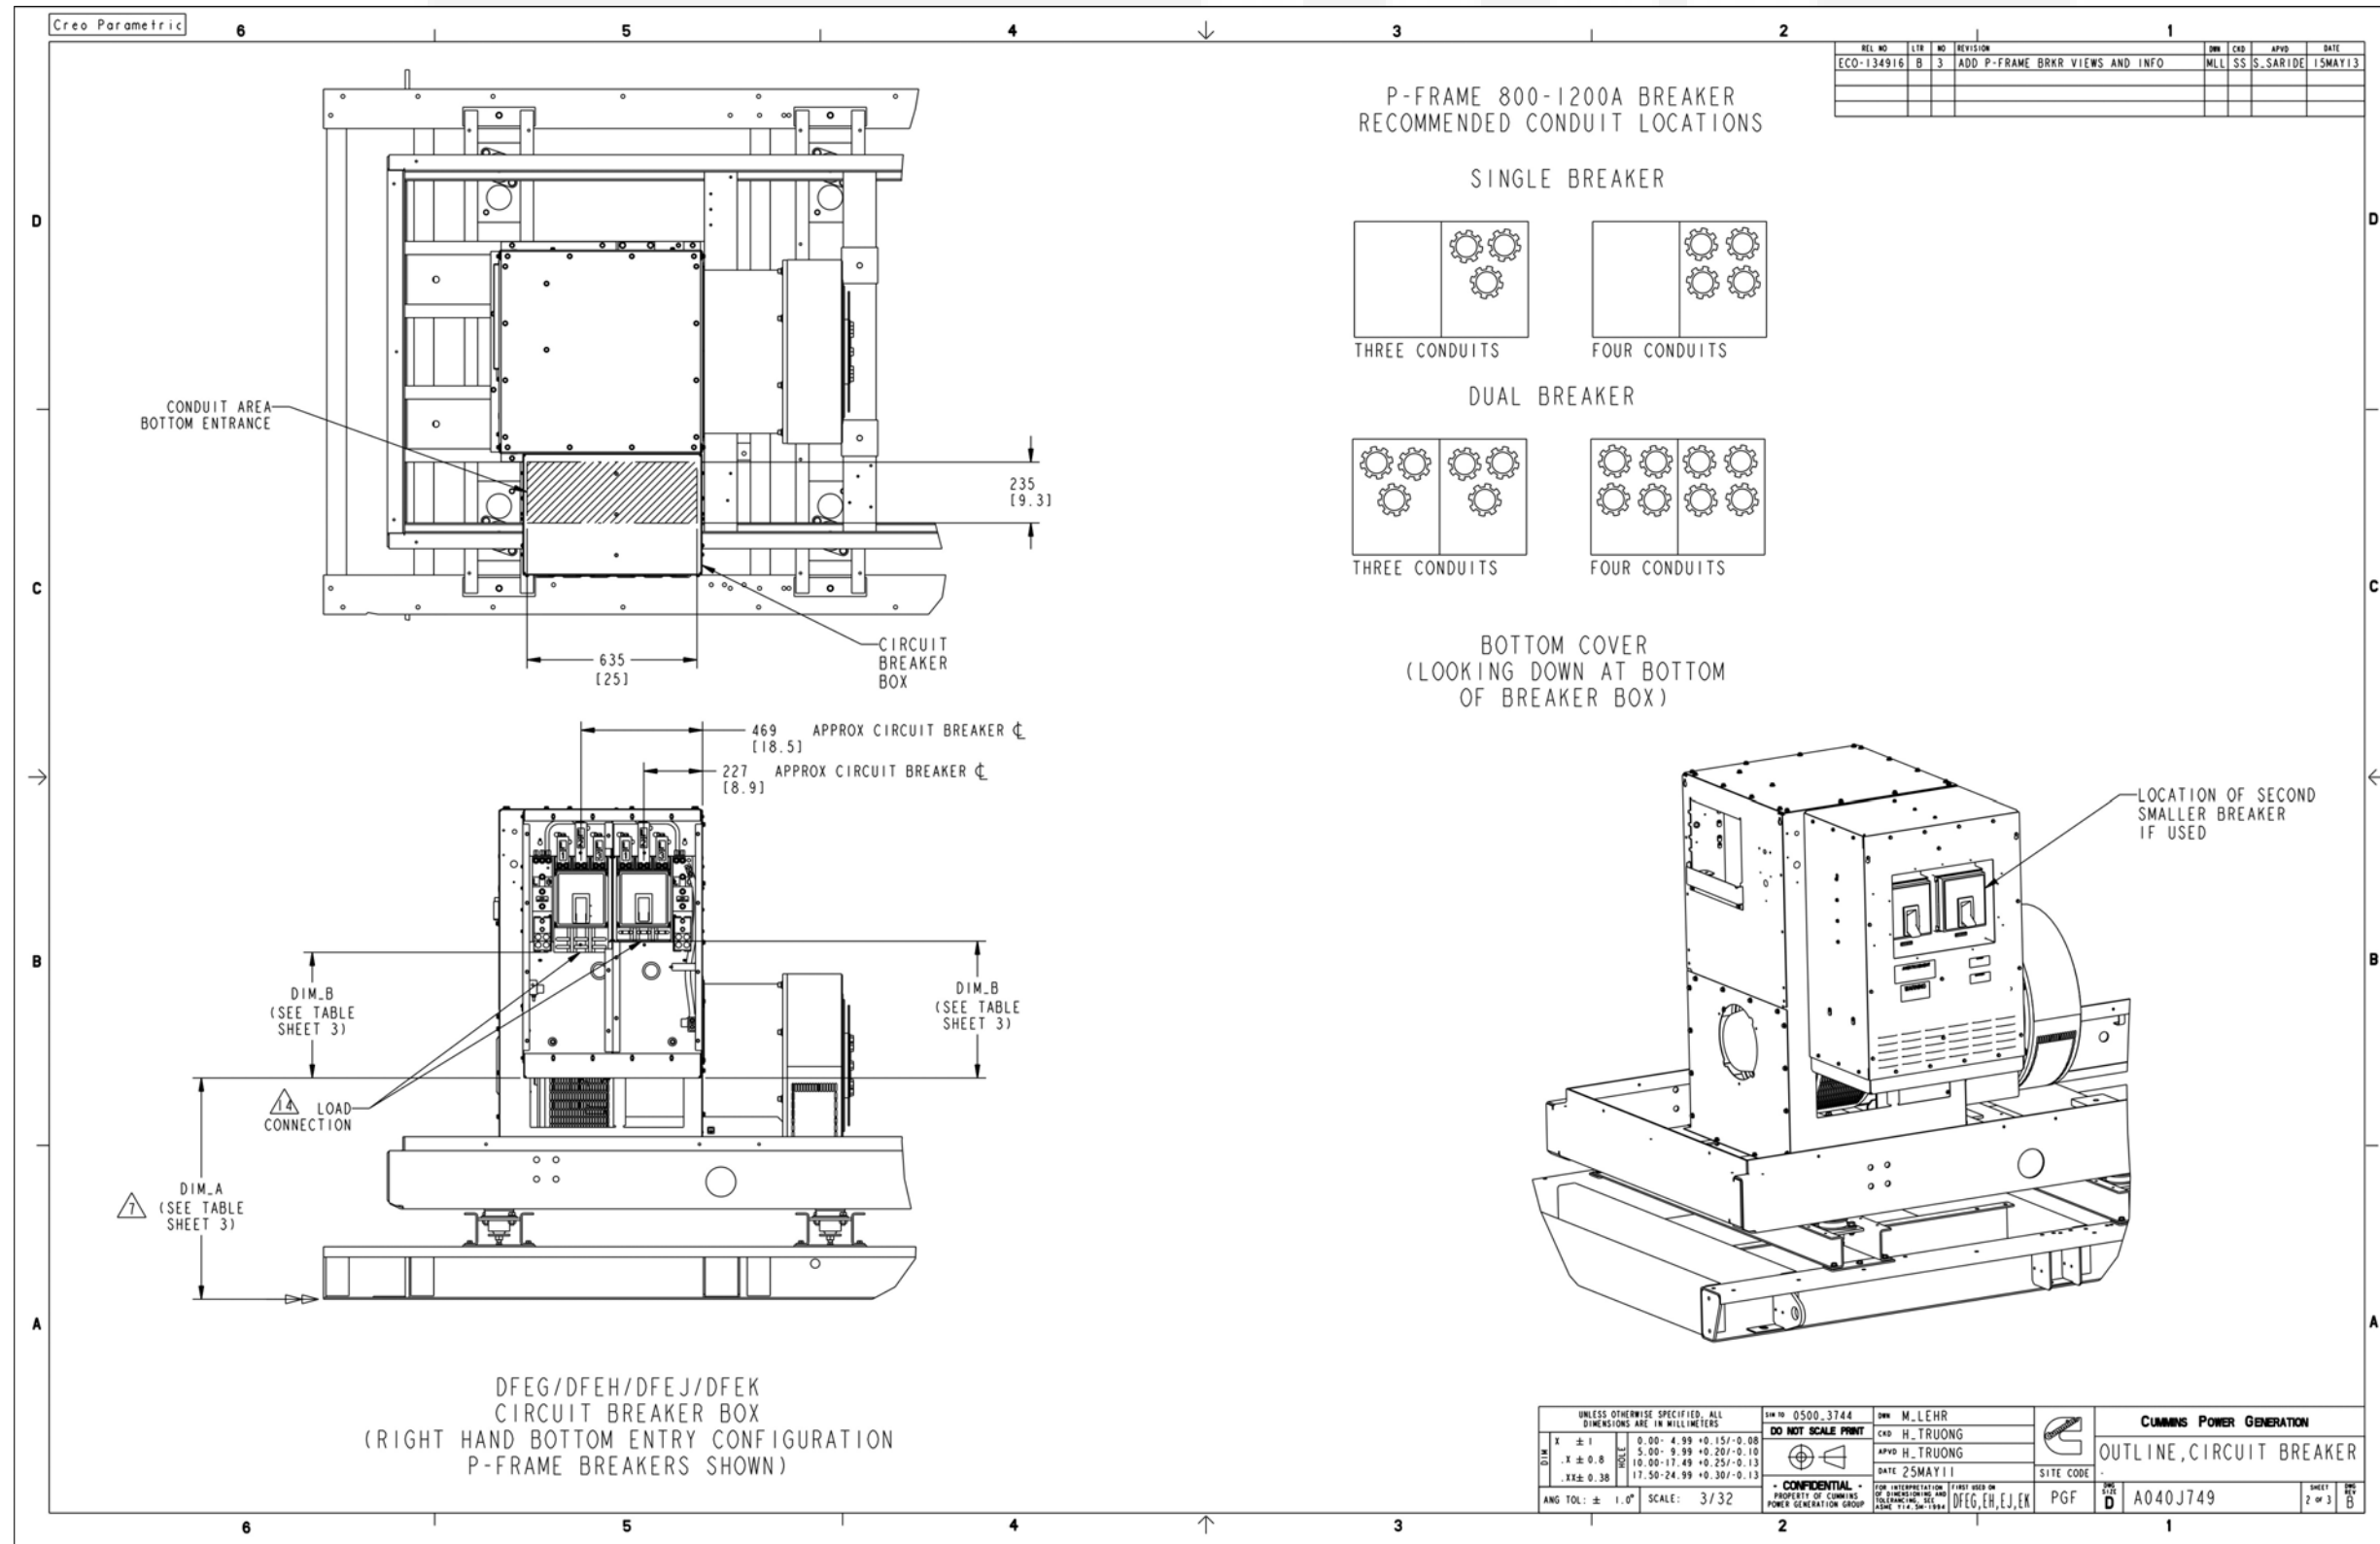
CIRCUIT BREAKER OUTLINE (SHEET 2)
